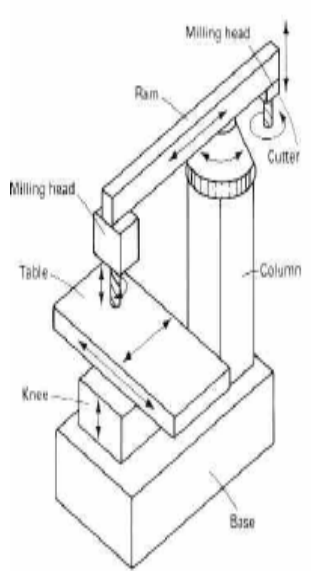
Principal components of a turret-type knee-and-column milling machine
